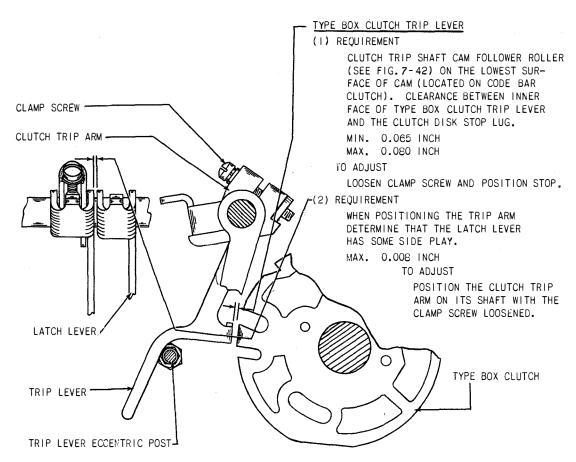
Automatic Typer, Type Box Clutch Mechanism
